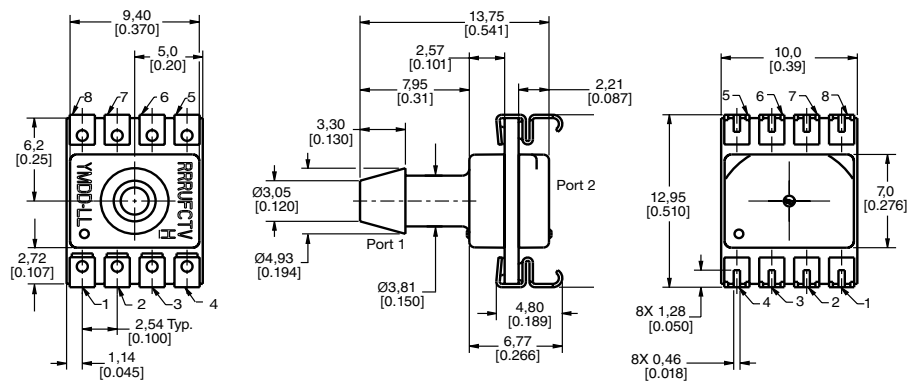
SMT Package Dimensional Drawings (For reference only: mm [in.])
